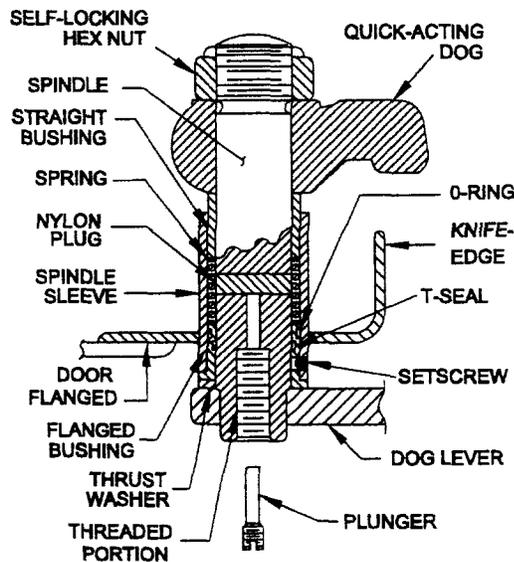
A. Quick-Acting Door Dog Lever Assembly (Cross Sectional View) Modified by MACHALT 167-31004 (ECP-444)
